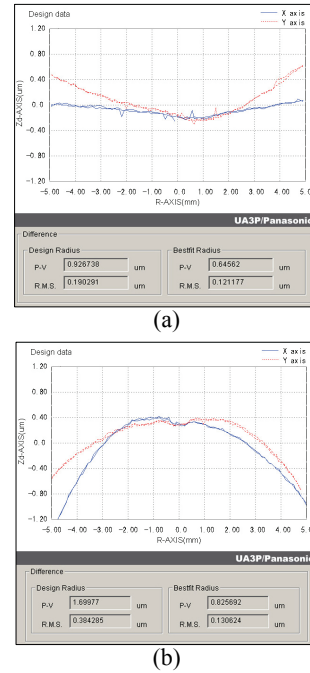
Form error of the lens molded with molding condition II : (a) Spherical (Upper core), (b) Aspherical (Lower core).
